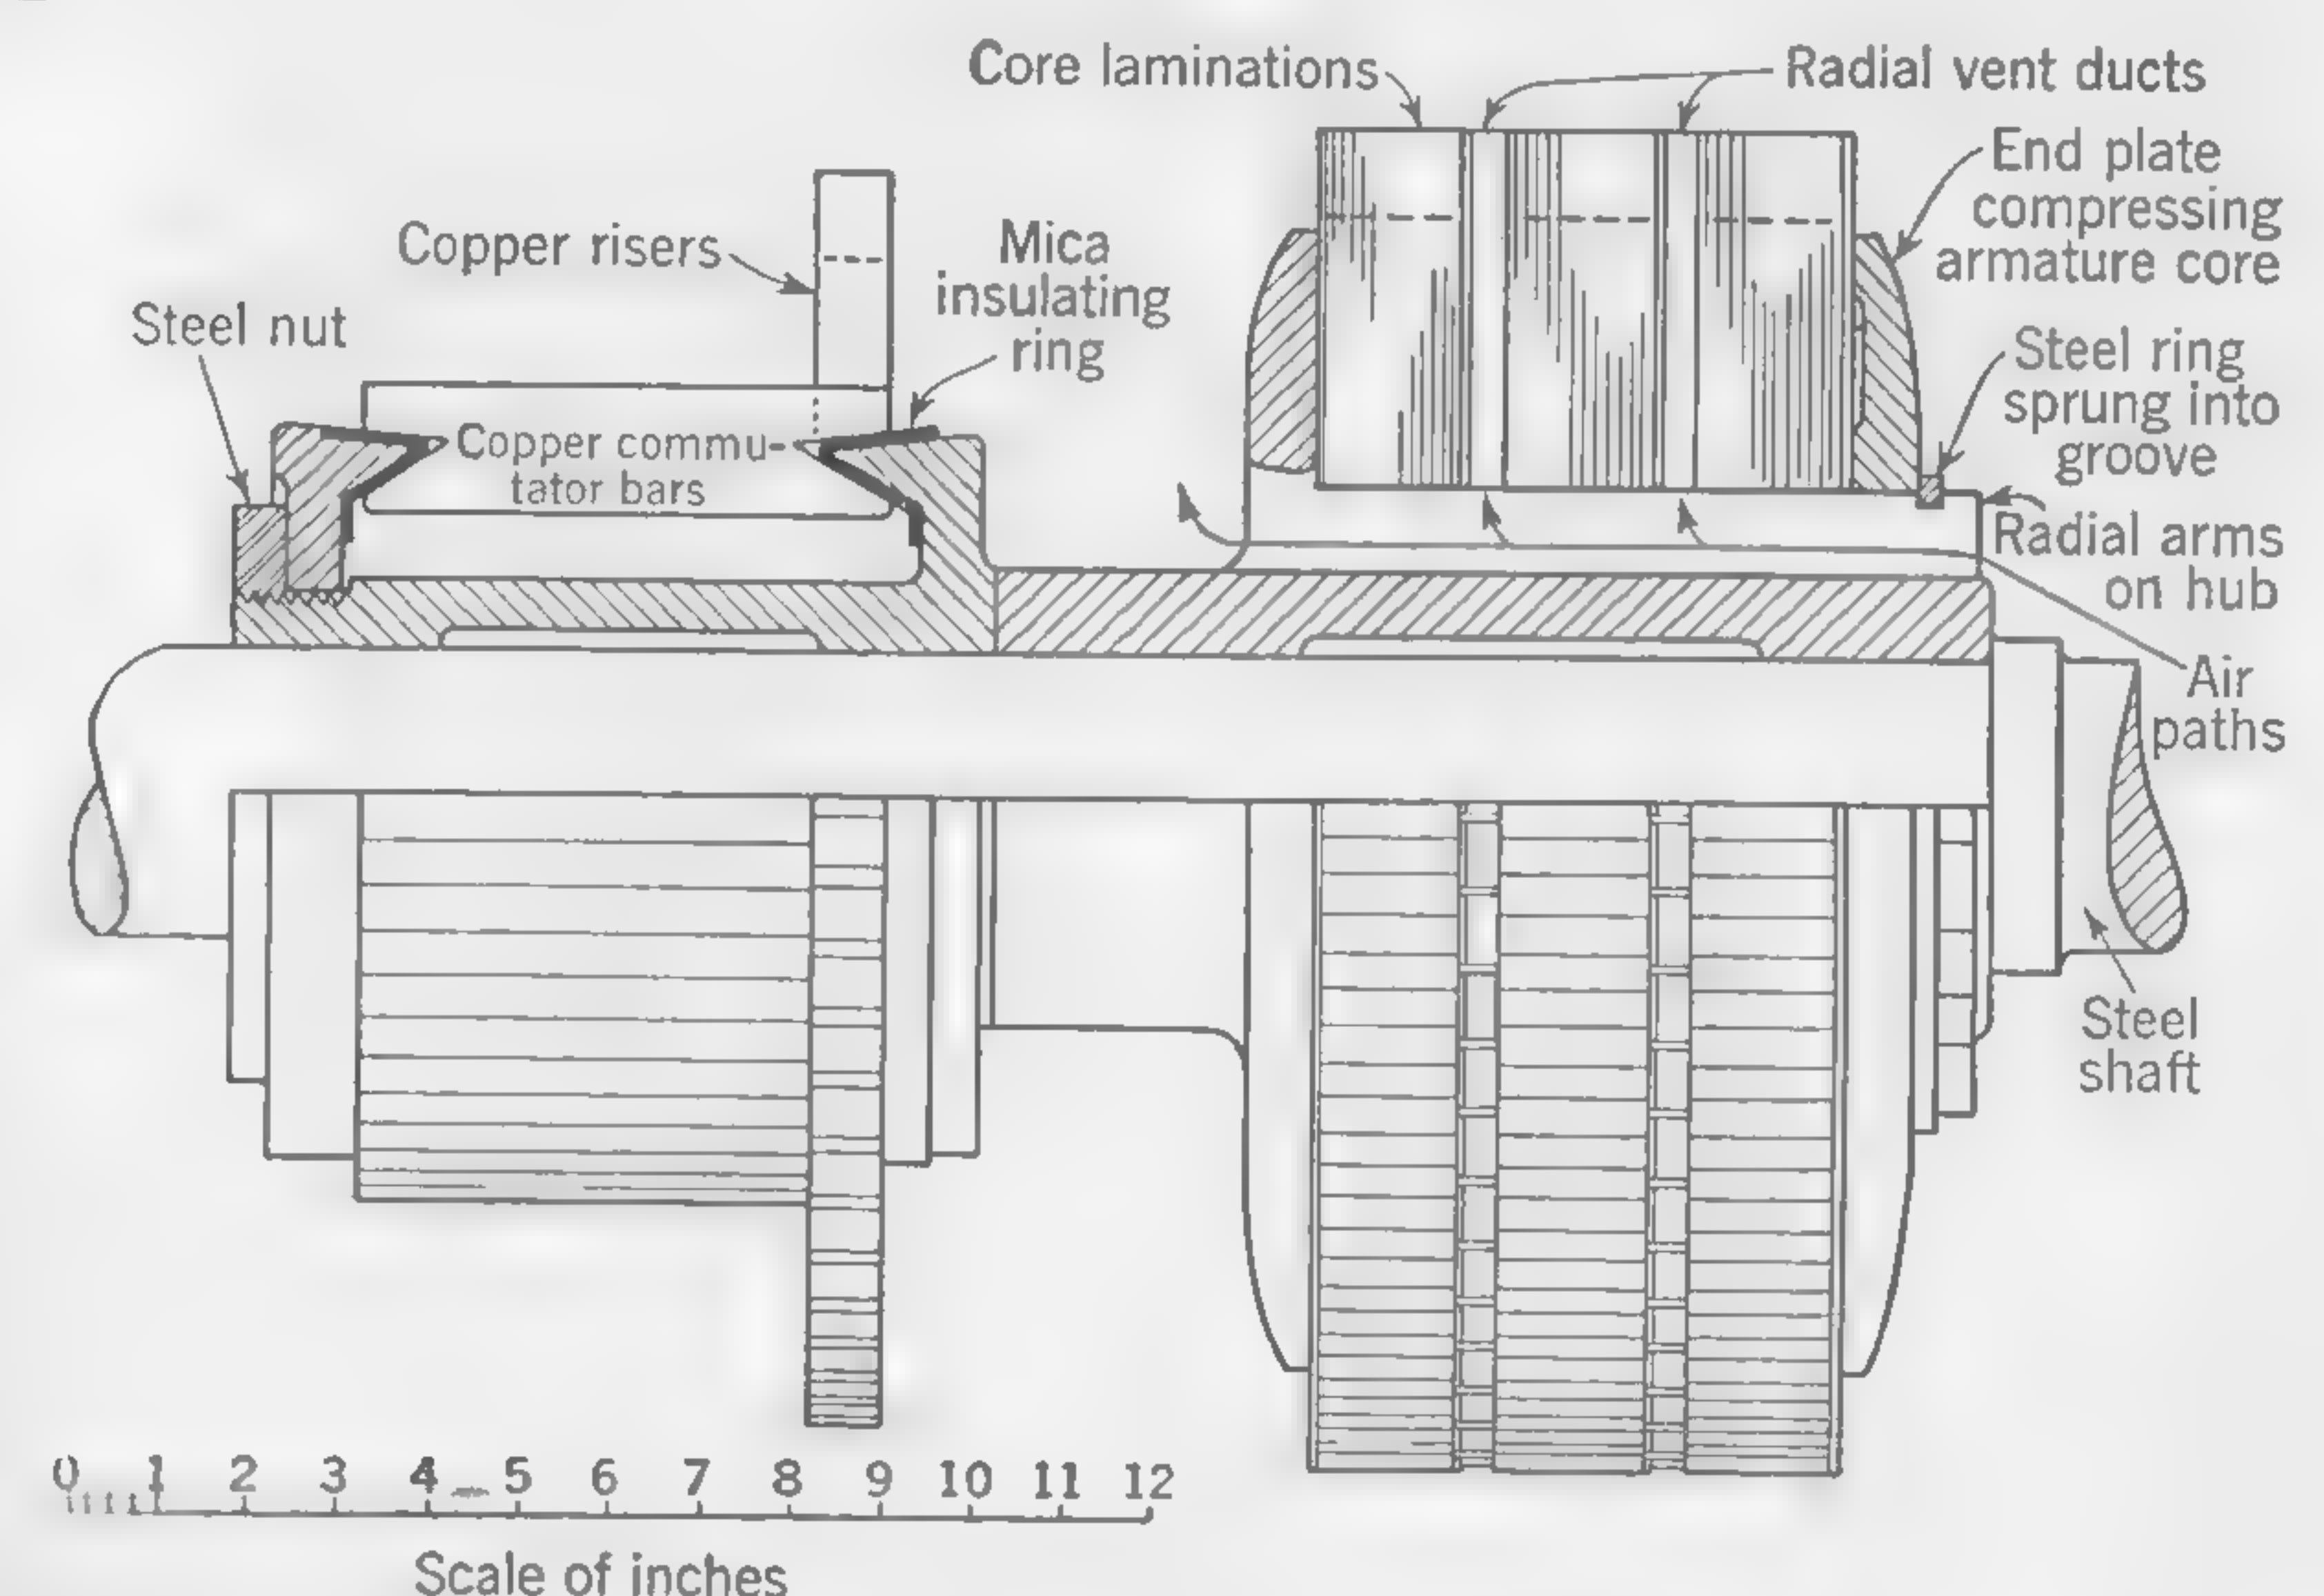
Assembly of armature core and commutator for small dynamo or motor.
